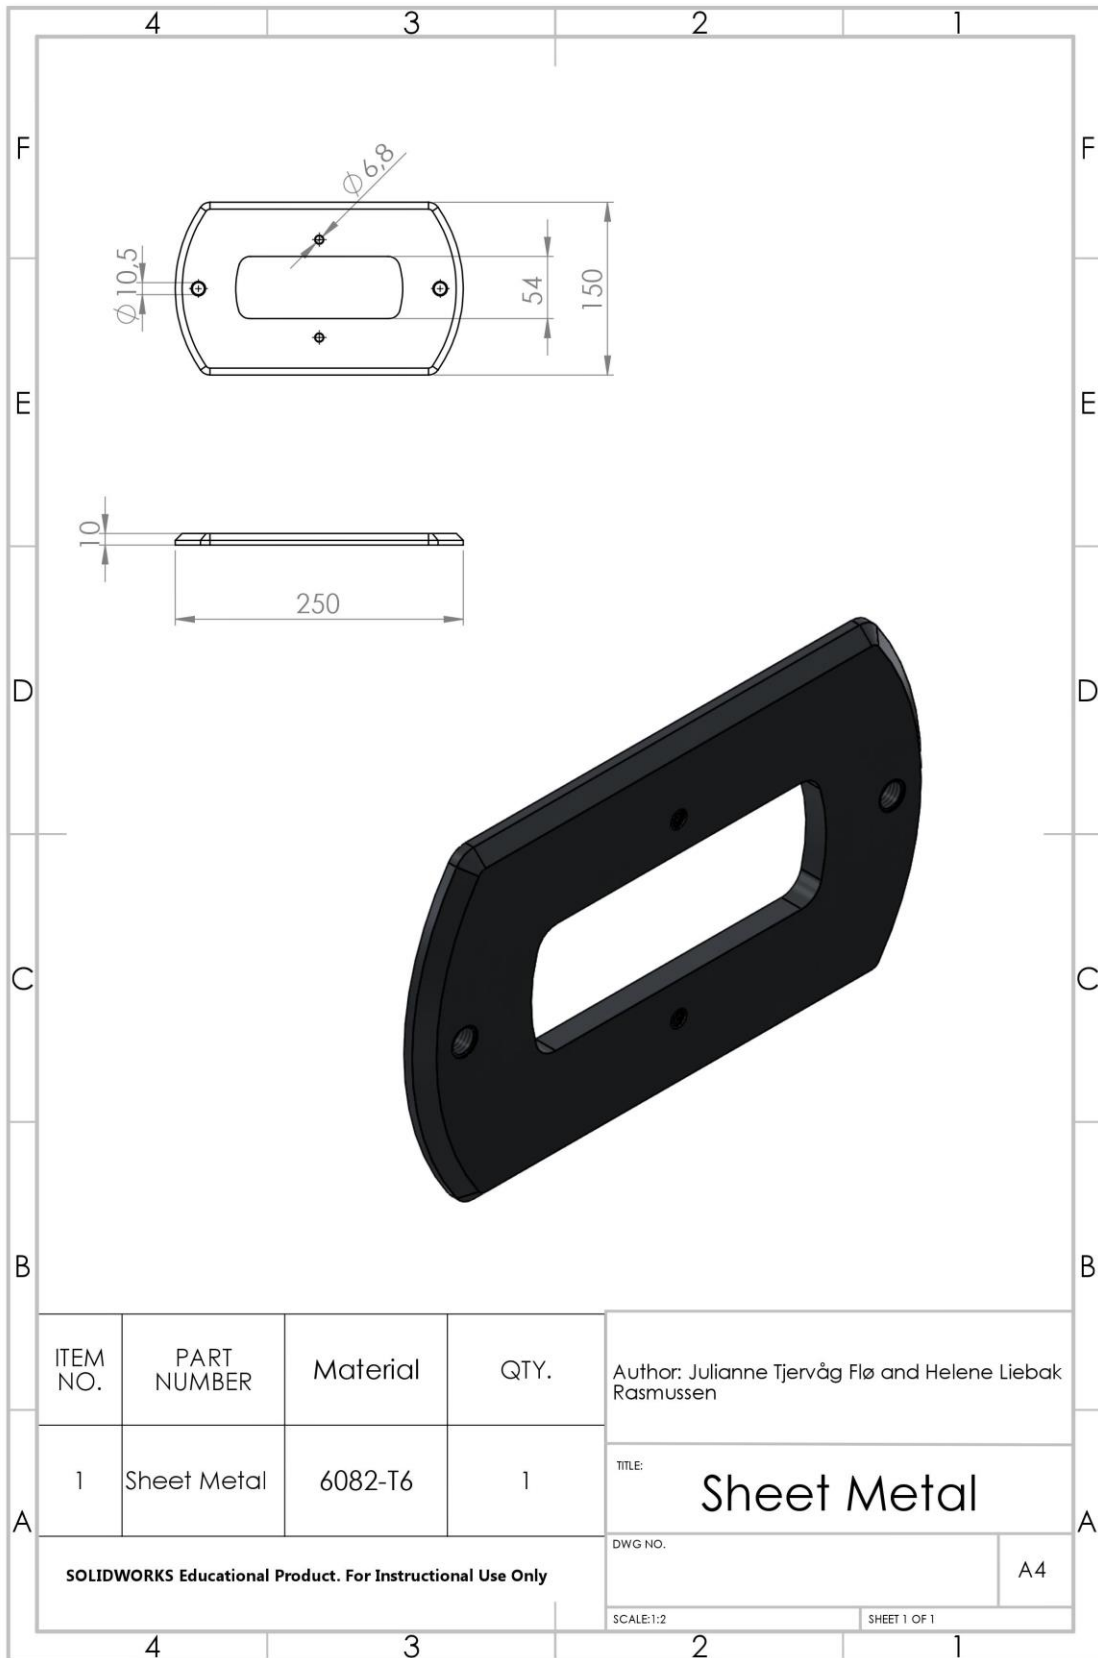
Technical drawing of the sheet metal. Created in SolidWorks.
